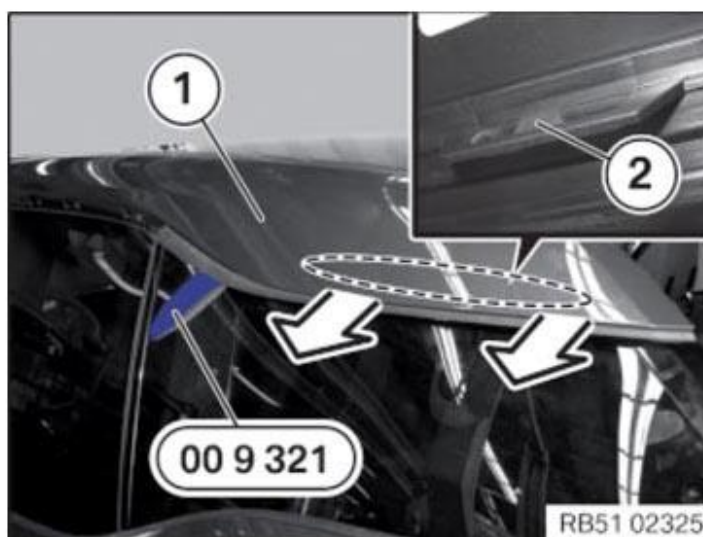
Identifying Rear Outer Roof Frame Trim Panel Clamps
